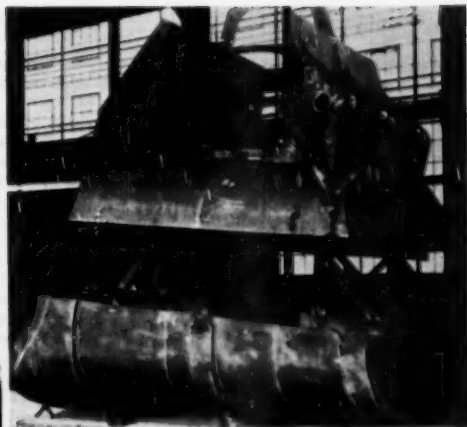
45-CU-YD BUCKET DURING ASSEMBLY
